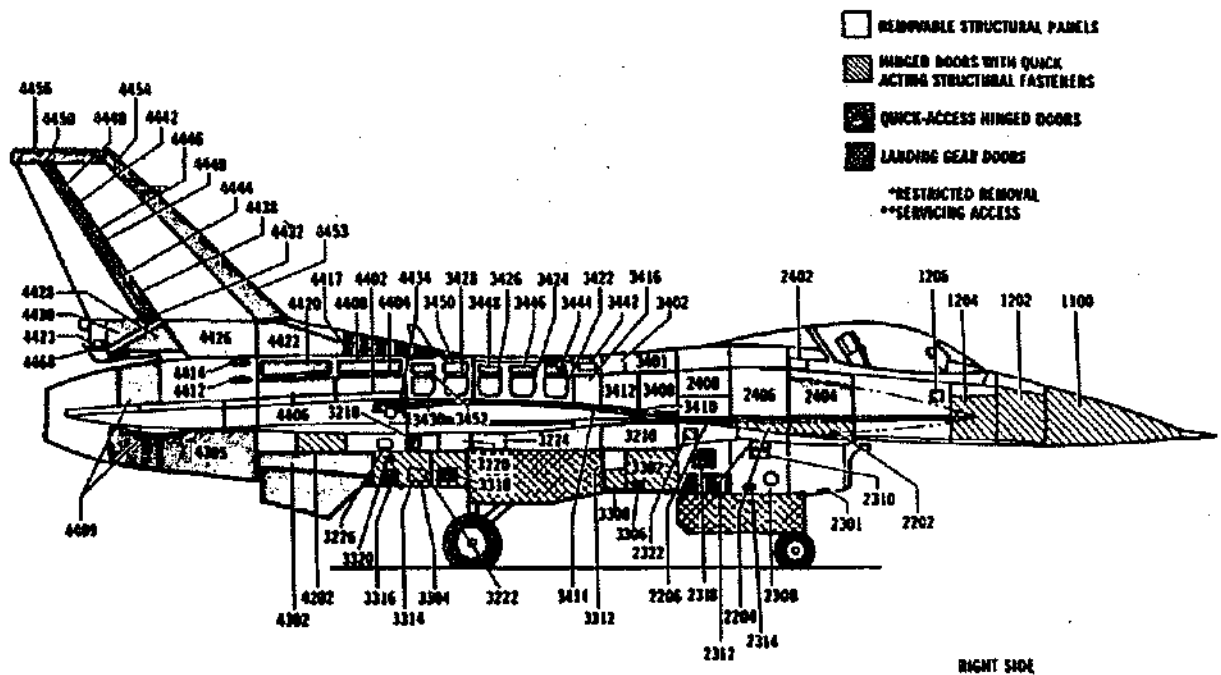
F-16C/D Access Doors and Panels (Right Side)
